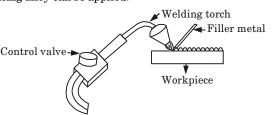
Hardfacing by oxy-acetylene welding.
